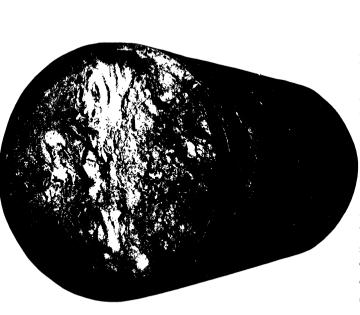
Section of a boiler tube entirely closed with scale, taken from a neglected boiler in the provinces.
